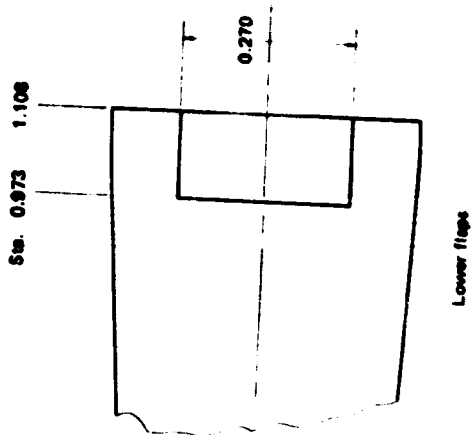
Model dimensions, given in fraction of model reference length ( $L = 50.8$  cm).
